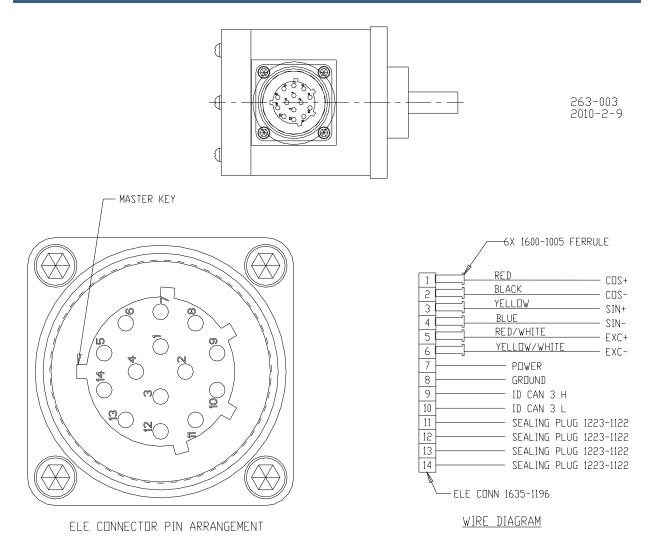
Valve Stem Resolver Wiring Diagram (all valves)
